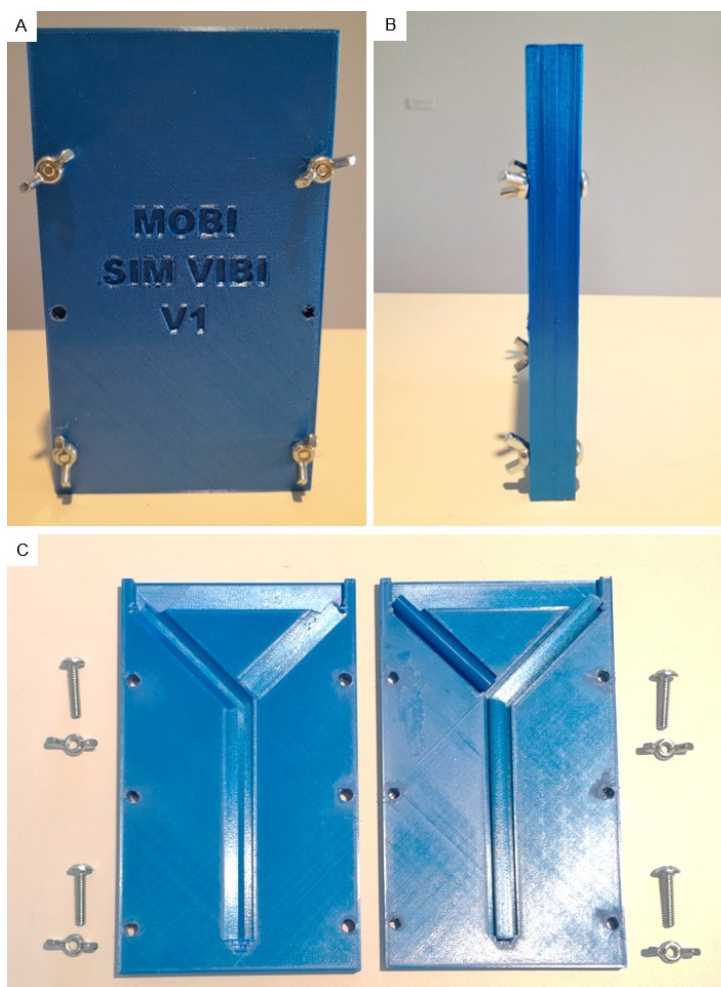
Printed and finished mold, ready for the pouring process. (A) External, front view and (B) side view with four thumbscrews that ensure the mold is watertight. (C) Internal detail of the components.
